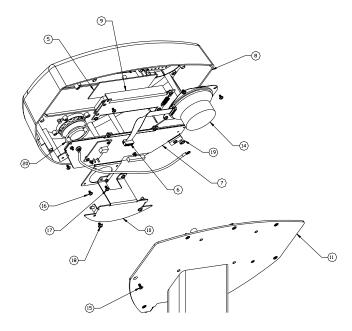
Front Cover Of Bowler Terminal Exposing Parts To Be Installed
